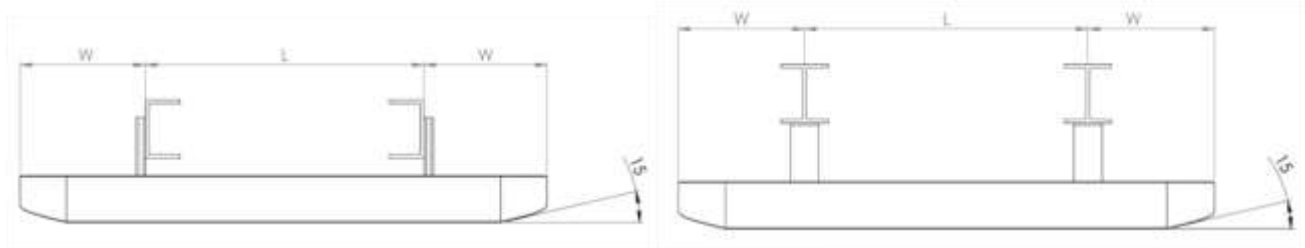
Front view illustrating the place of FUPD is fitted to the carrier bridge
